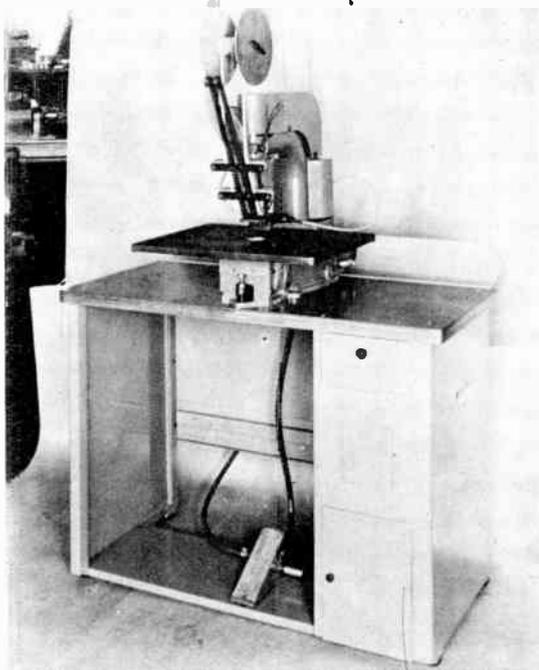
A Component Inserting Machine mounted on a bench for semi-automatic assembly of axial-lead components on to printed wiring boards.
